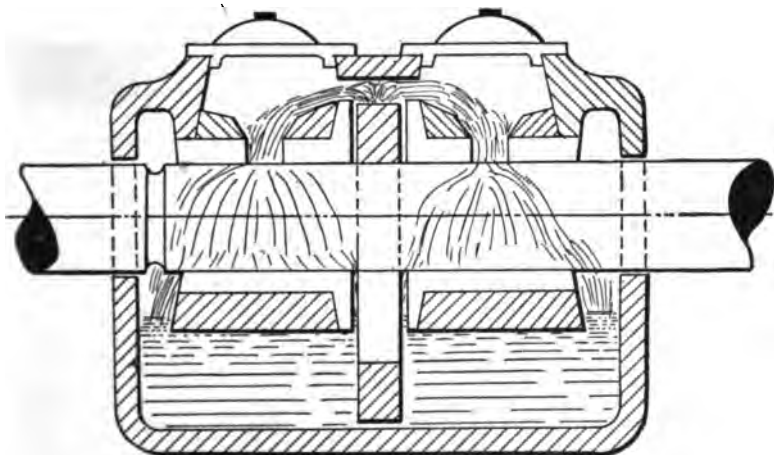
SEC. 7e.—Bearing equipped with ring-fed lubrication.
